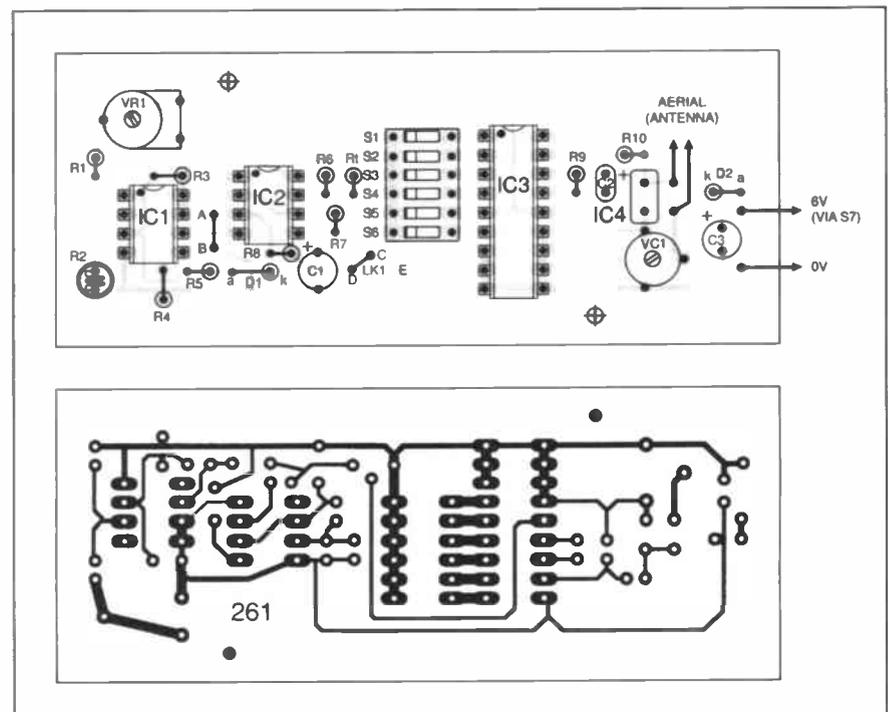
Printed circuit board component layout and full size underside copper foil track master for the Transmitter.
